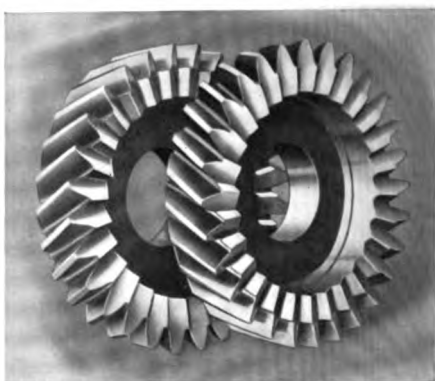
Right and Left-hand Helical Gear Shaper Cutters
